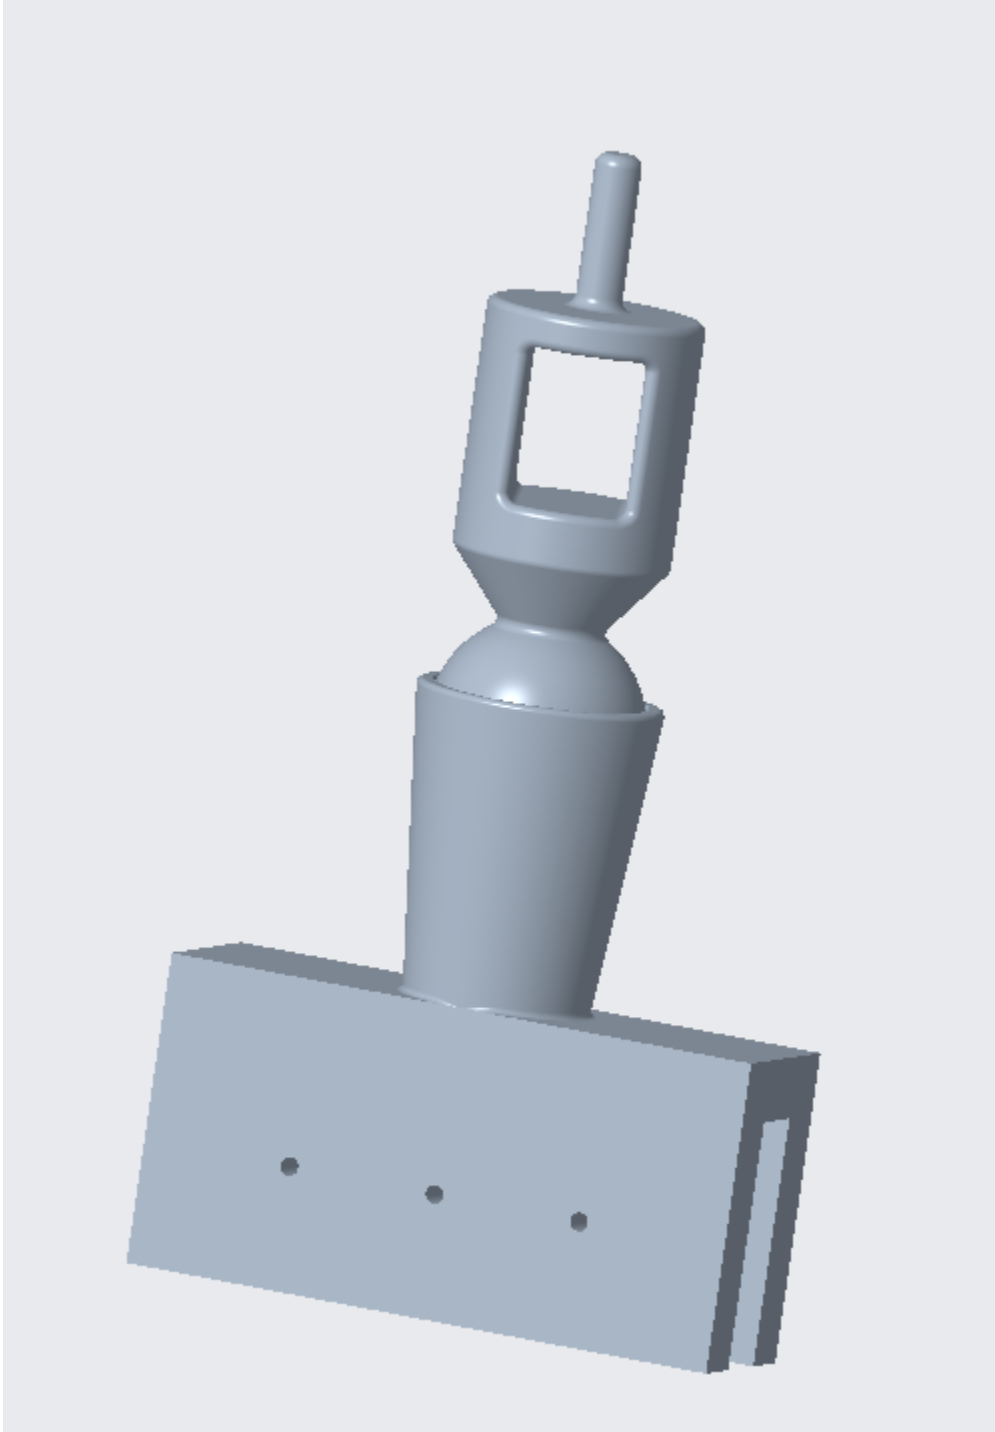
A 3D model of the assembly of the contributed ball joint.
